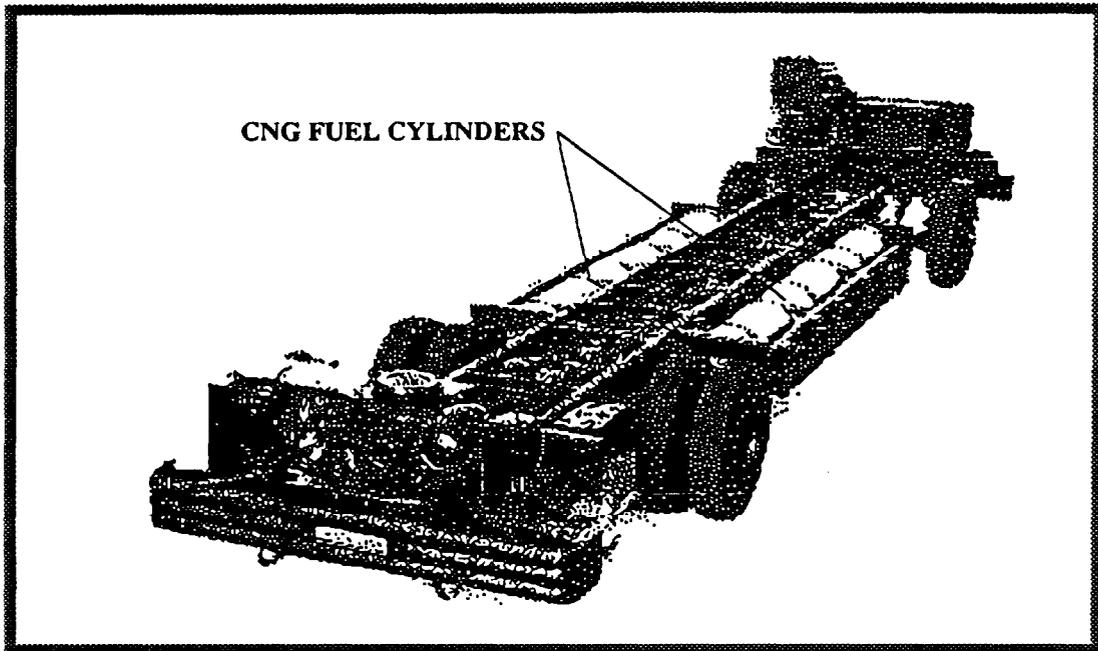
Chassis of Blue Bird CNG bus with CNG fuel cylinders (Ref 21)
